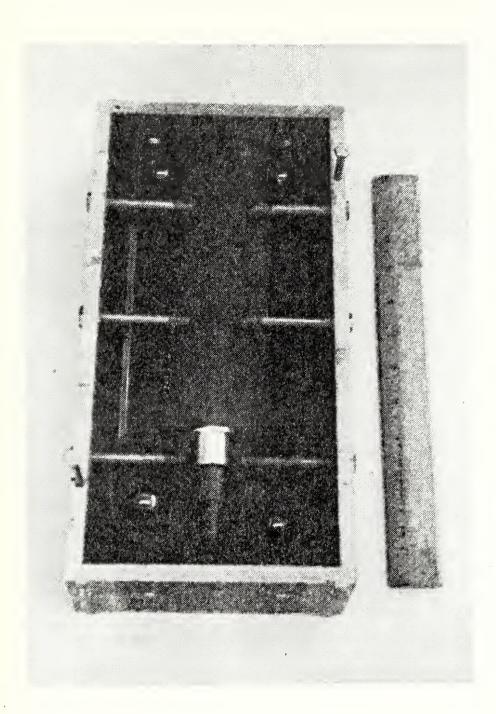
(1) Mold frame set up prior to pouring of mold silicone.
